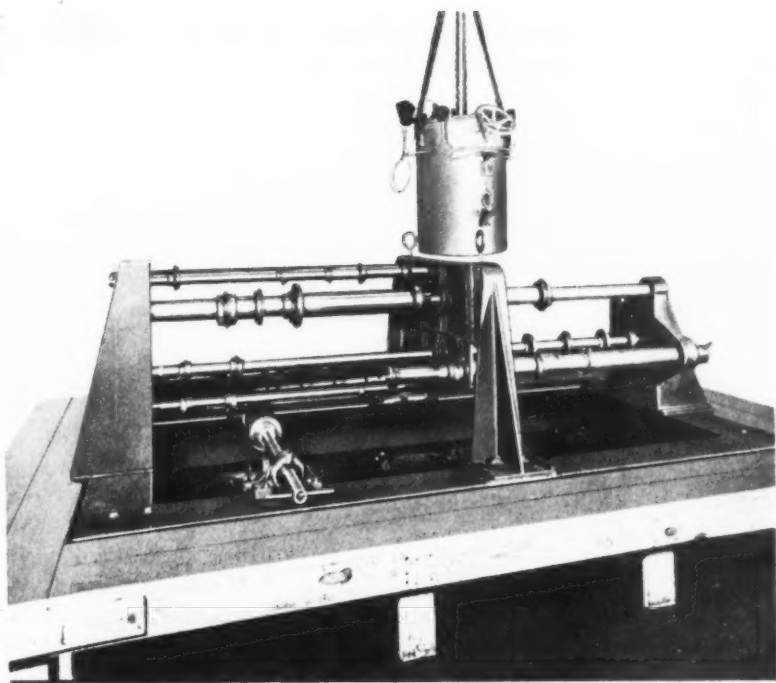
Pouring Fixture for the Casting in Place of the Locating and Supporting Bushings in the Bed
